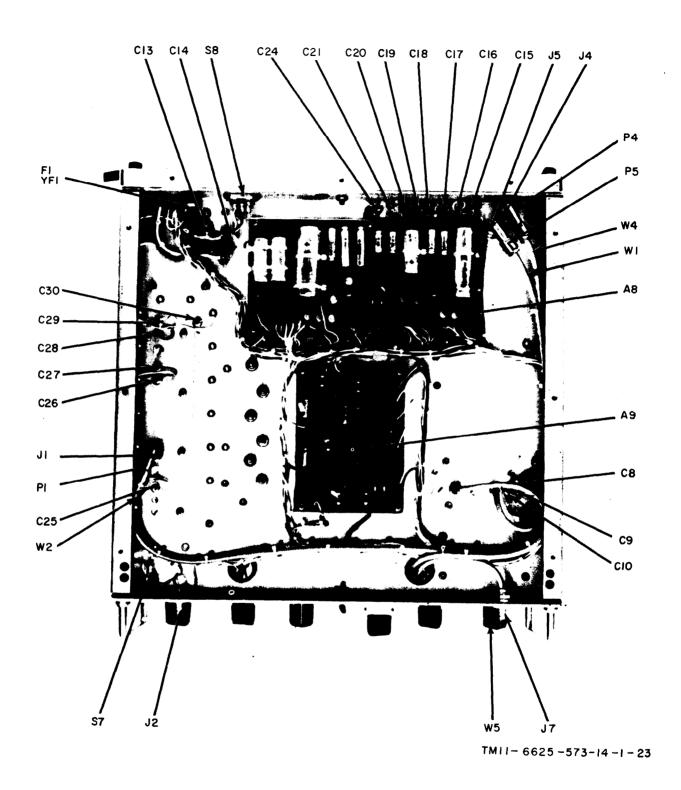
Generator, Signal SG-497C/GRM-50, assembly parts location diagram, cover removed, bottom view.
